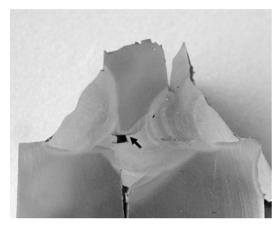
Joint 4, Welding seam between the corner profile and the plate overlaps to the joint between the two elements making up the plates. Lack of penetration of the filler metal and lack of fusion (arrows)
